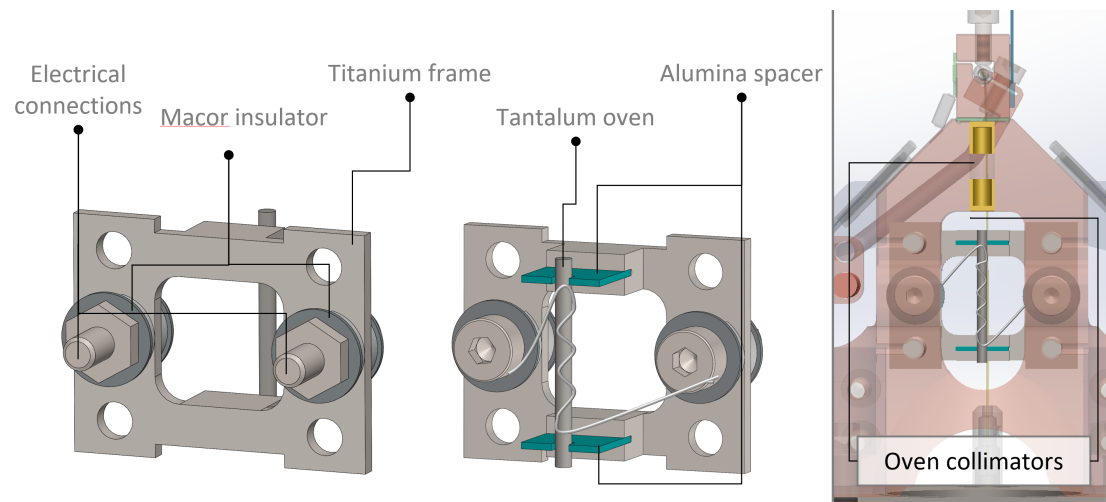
This shows the oven assembly and the way it is mounted into the trap. Original SolidWorks drawing created by Dr Gonzalvo.
